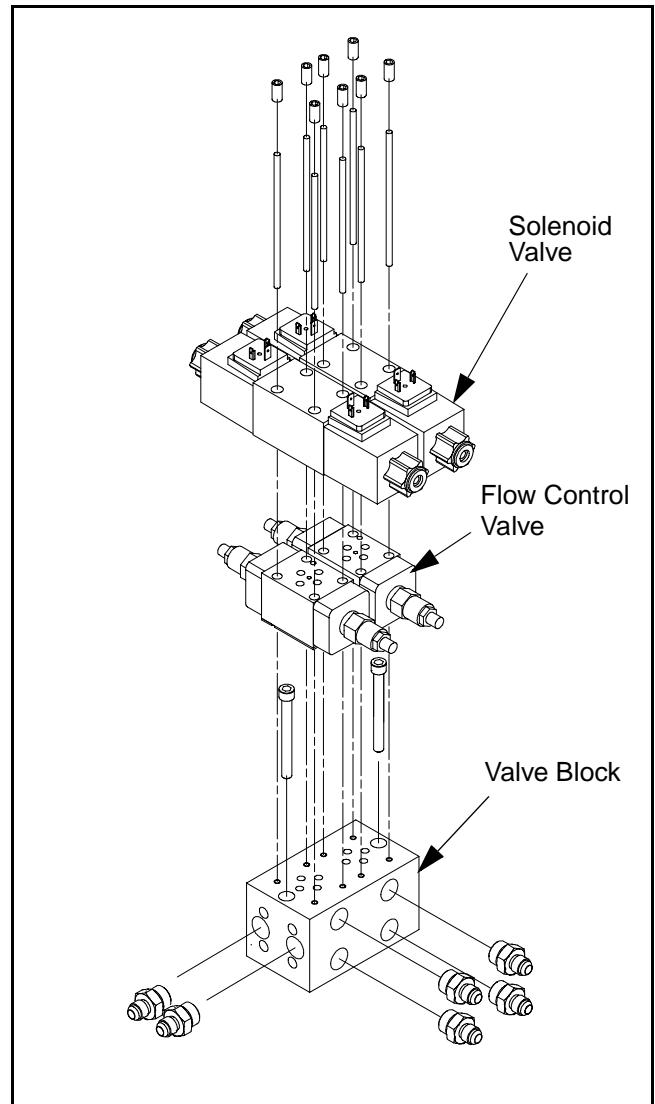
35 Conveyor Swing/Raise Valve Bank
